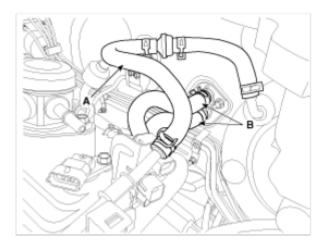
Identifying Brake Booster Vacuum Hose And Heater Hose Courtesy of HYUNDAI MOTOR AMERICA
